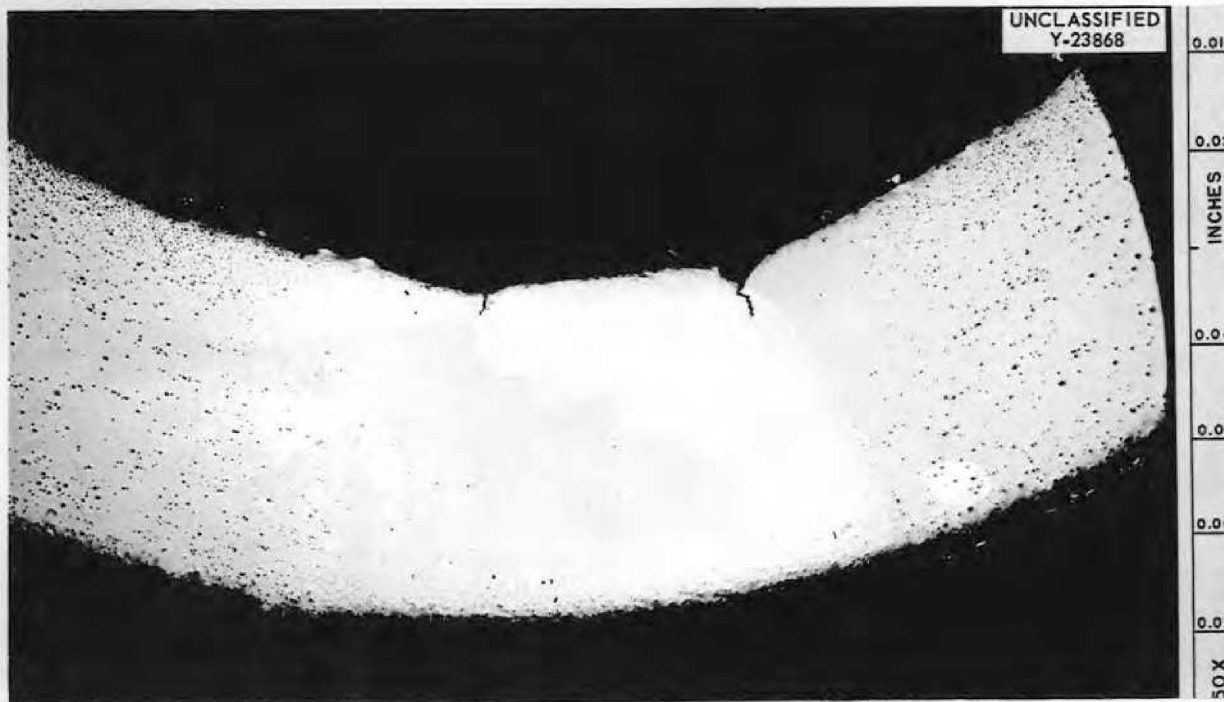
Weldrawn Hastelloy B Tubing Showing Cracks at the Root of the Weld Bead. Unetched. 50X.
